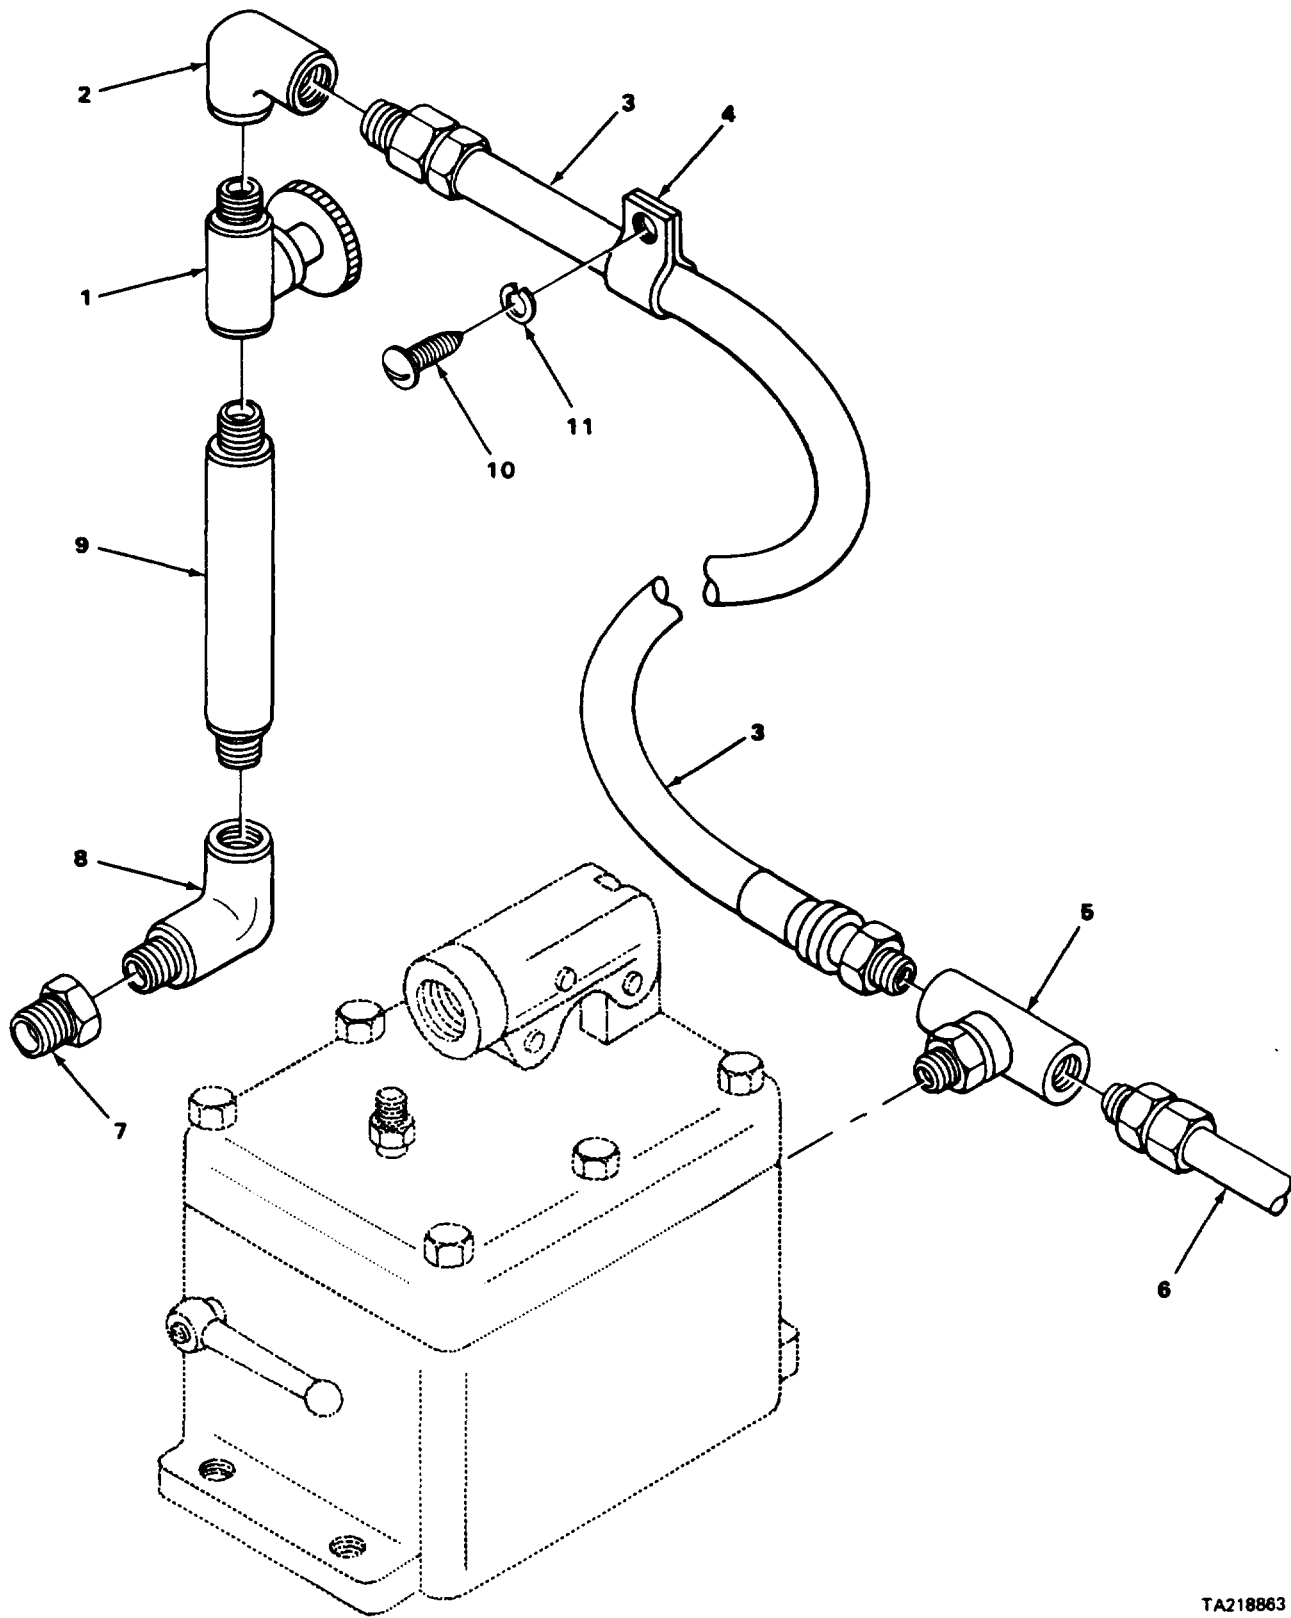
HYDRAULIC PUMP ASSEMBLY.
